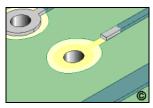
Remove the defective land and soldermask from the connecting circuit.
